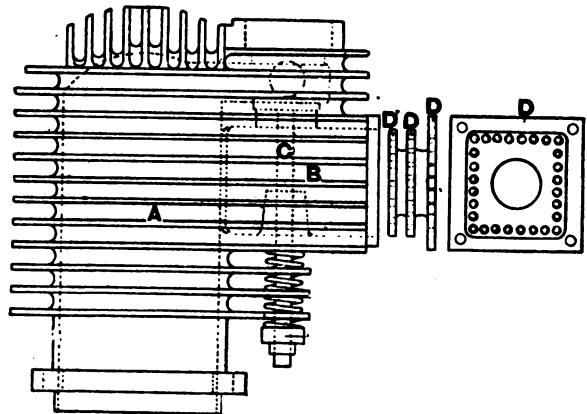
CYLINDER OF REX BICYCLE MOTOR, SHOWING NEW EXHAUST DEVICE.
